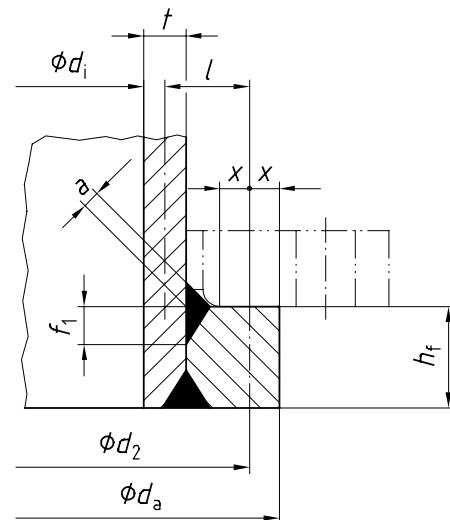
Welded-on stub flange (shown without gasket)
